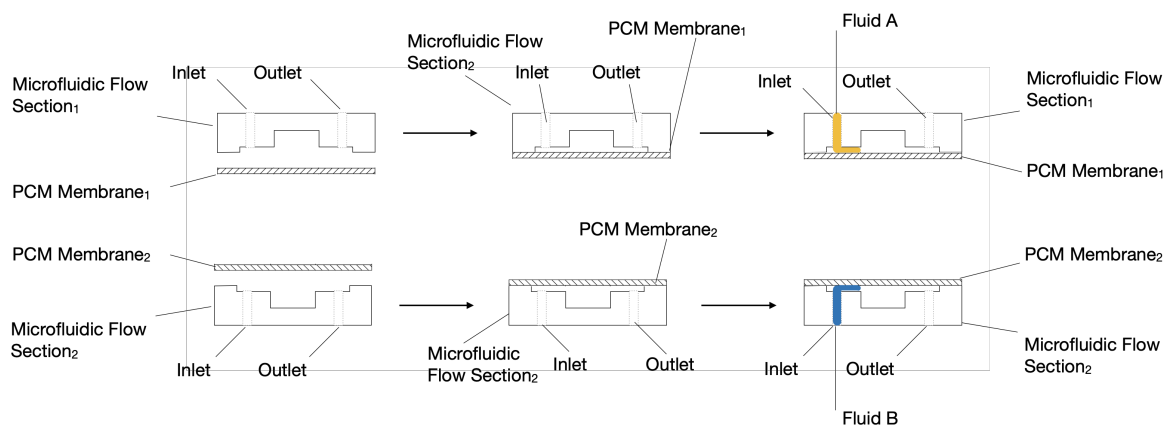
Schematic of Double Membrane Layer Assembly & Loading. Independent sealing of each device layer allows separate fluidic operation and assembly.
